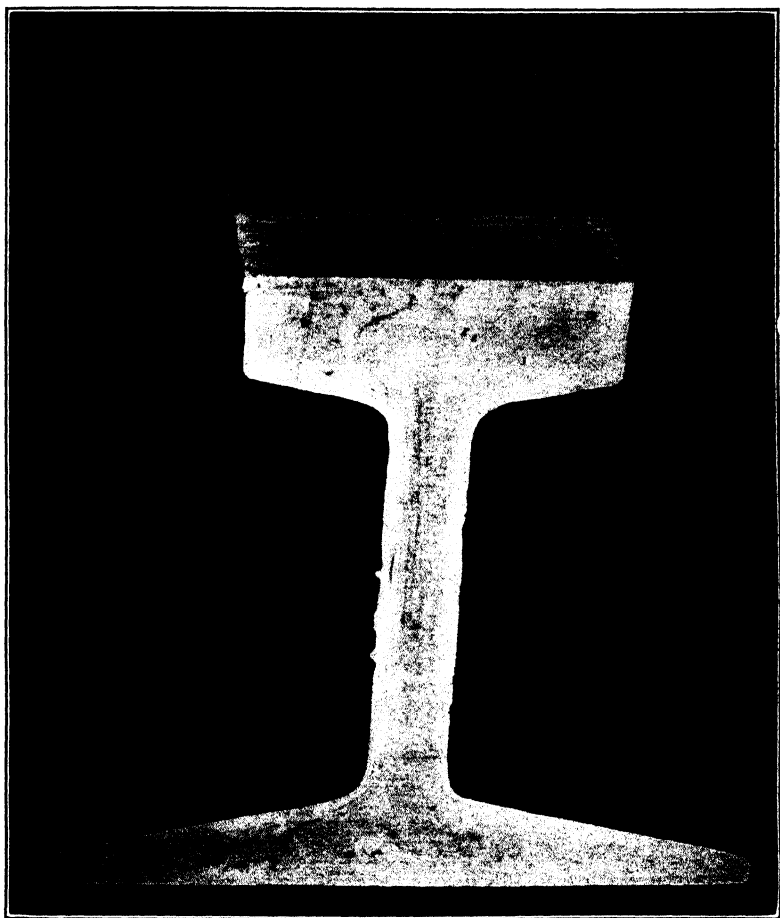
END VIEW OF STEEL RAIL, POLISHED AND ETCHED, SHOWING MARKINGS ON CROSS-SECTION AND THEIR CONNECTION WITH LONGITUDINAL STREAKS.
